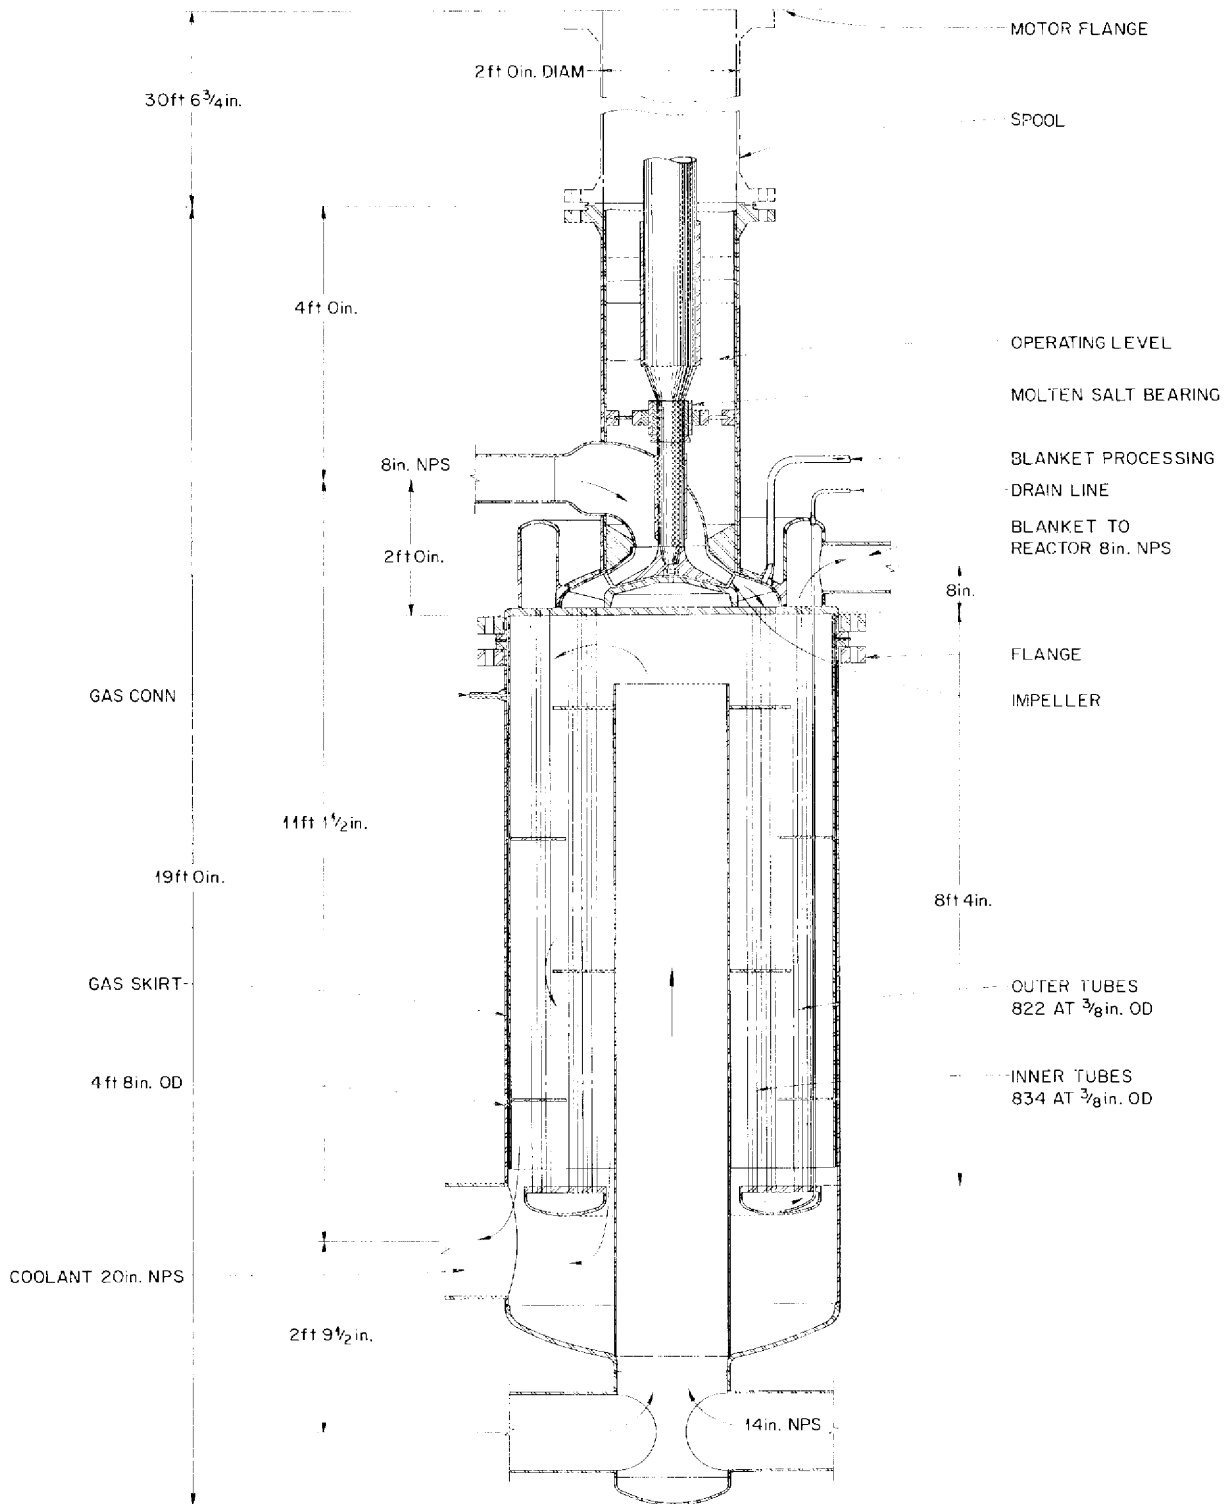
Blanket Heat Exchanger and Pump. 250 Mw (electrical) unit.
